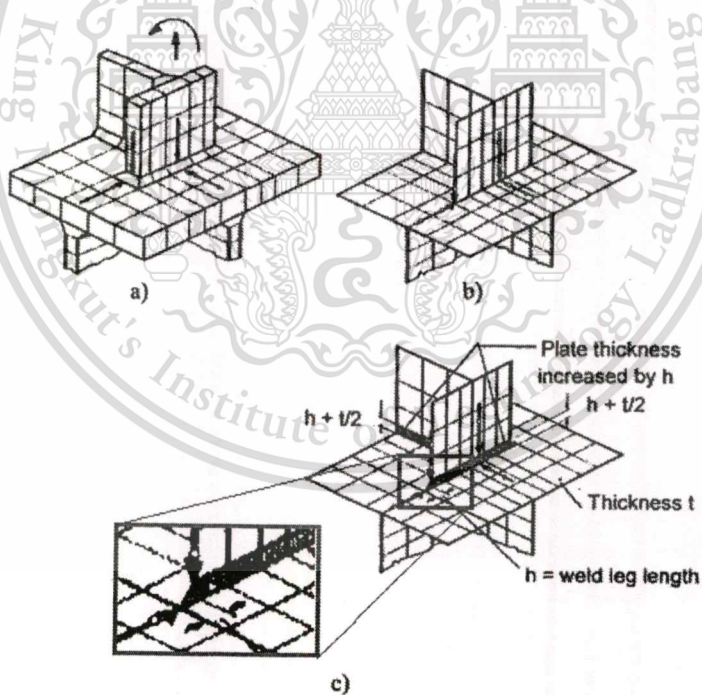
a) solid element model with weld modeling; b) shell element model without weld modeling; c) attachment welds modeled with reinforced plate strips (Niemi E. et al.).
